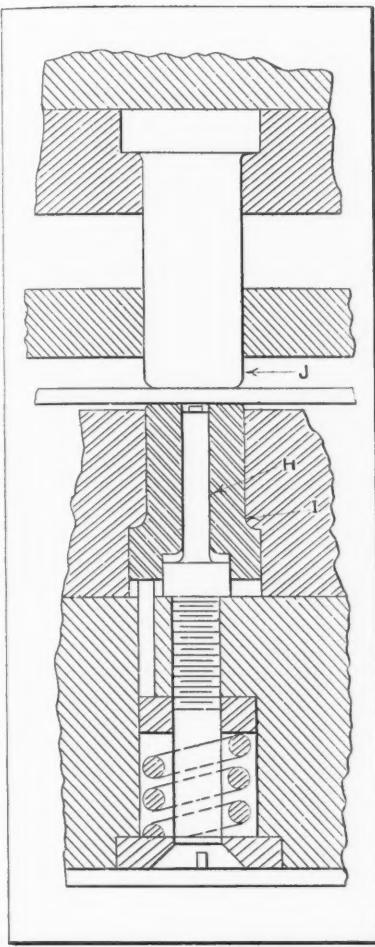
Section of Die Illustrated in Fig. 1, Showing how Strip is Partly Pierced from the Bottom
